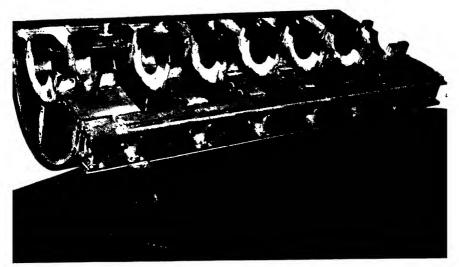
Bed Plate for Cylinder Block (Fig. 202) ready for Machining
